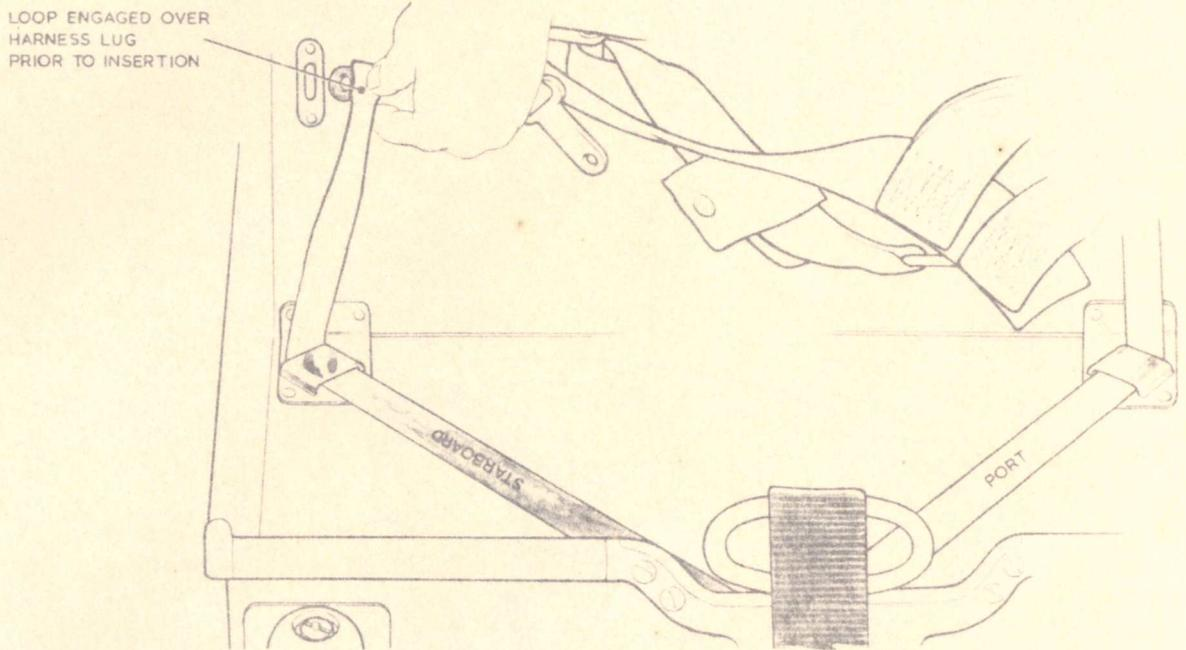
Inserting the starboard bottom harness lock (port similar)
